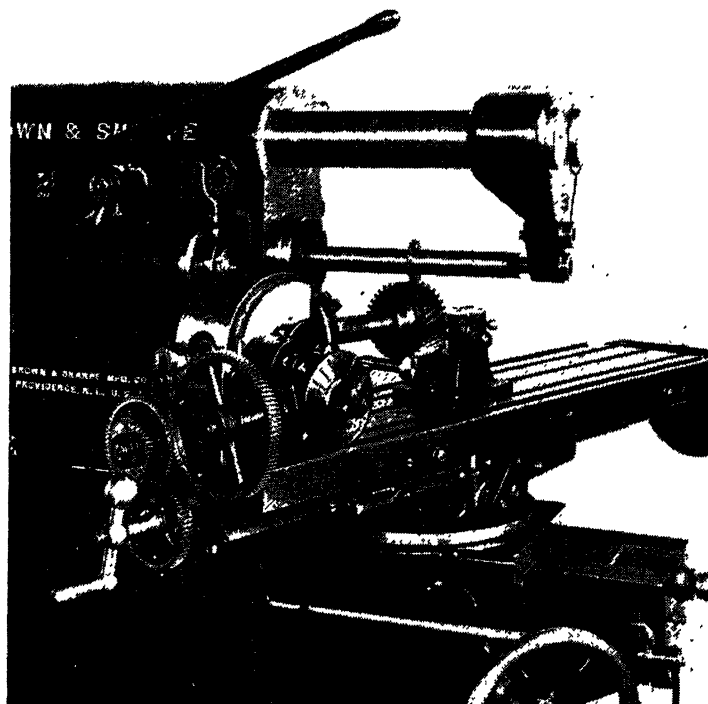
(b). Cutting Gear Teeth by the Formed Milling Cutter Method.
